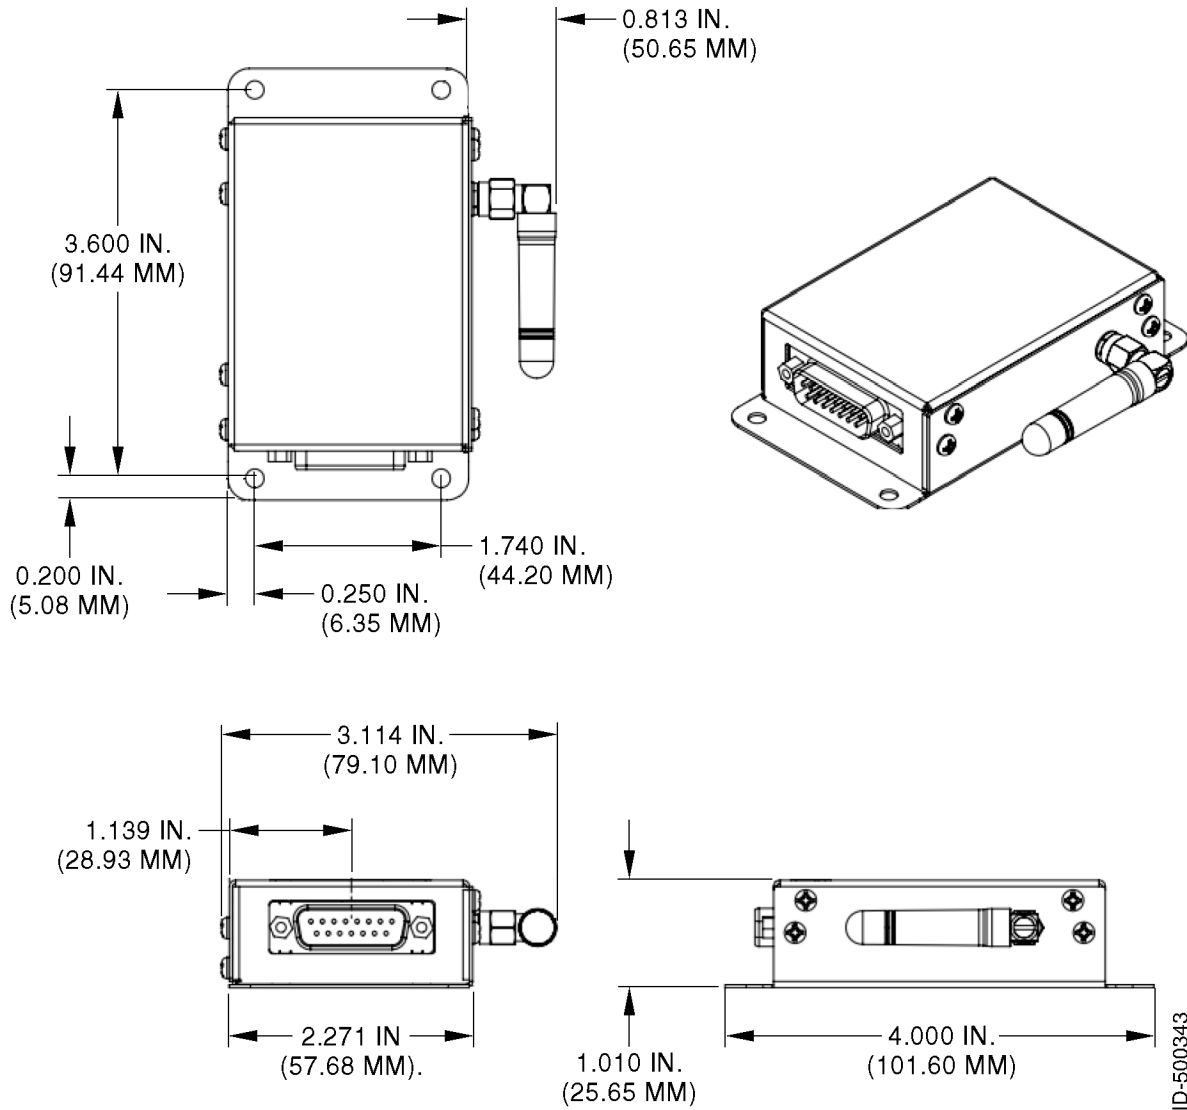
(Sheet 1 of 1) WiFi Module Mounting Dimensions
